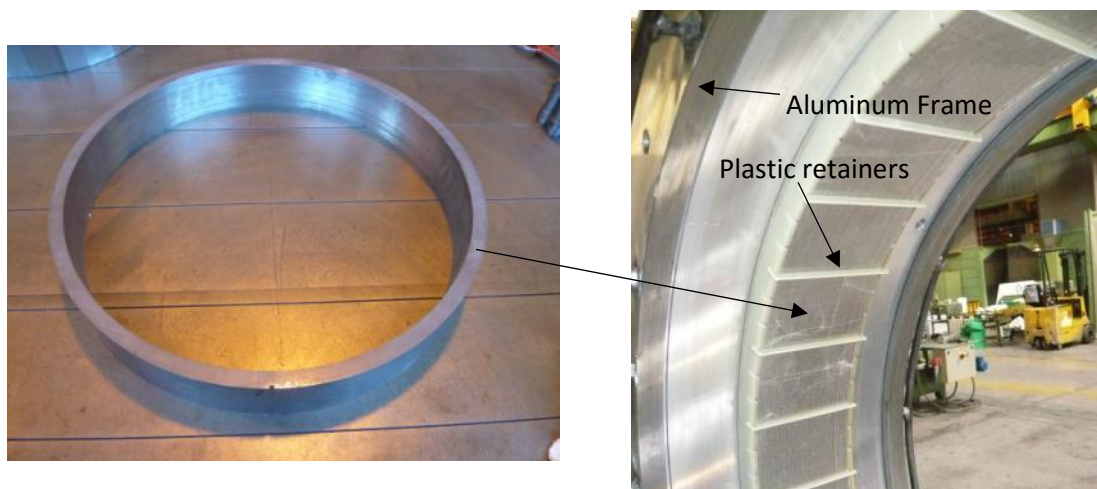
a) stator iron core of a slotless machine b) stator iron core of a slotless machine with some of the winding retainers
